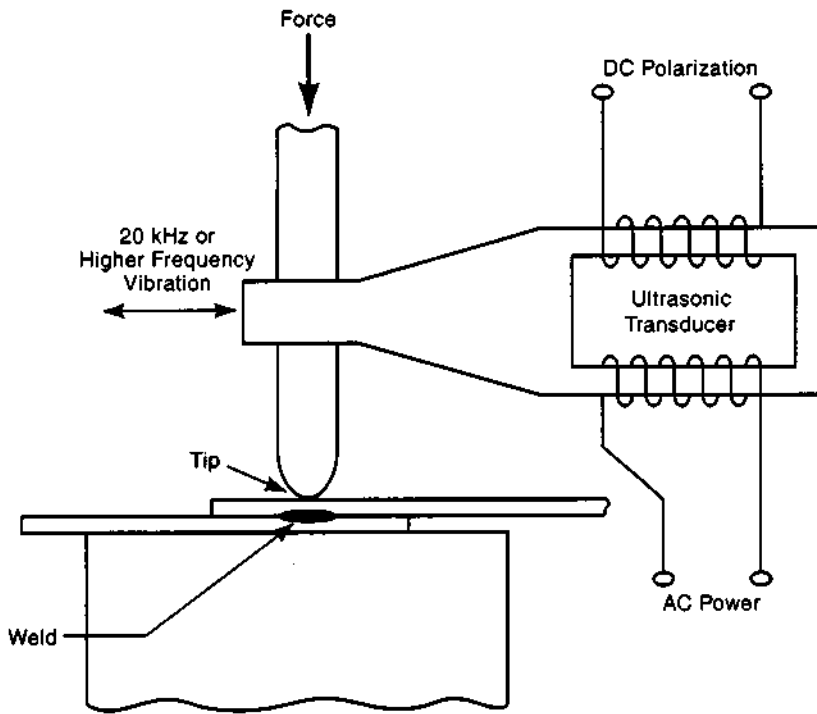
C13h Ultrasonic welding of sheet metal.
